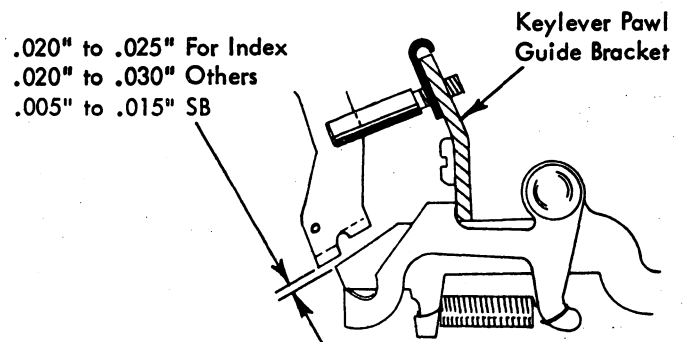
Keylever Pawl To Interposer Clearance Adjustment
